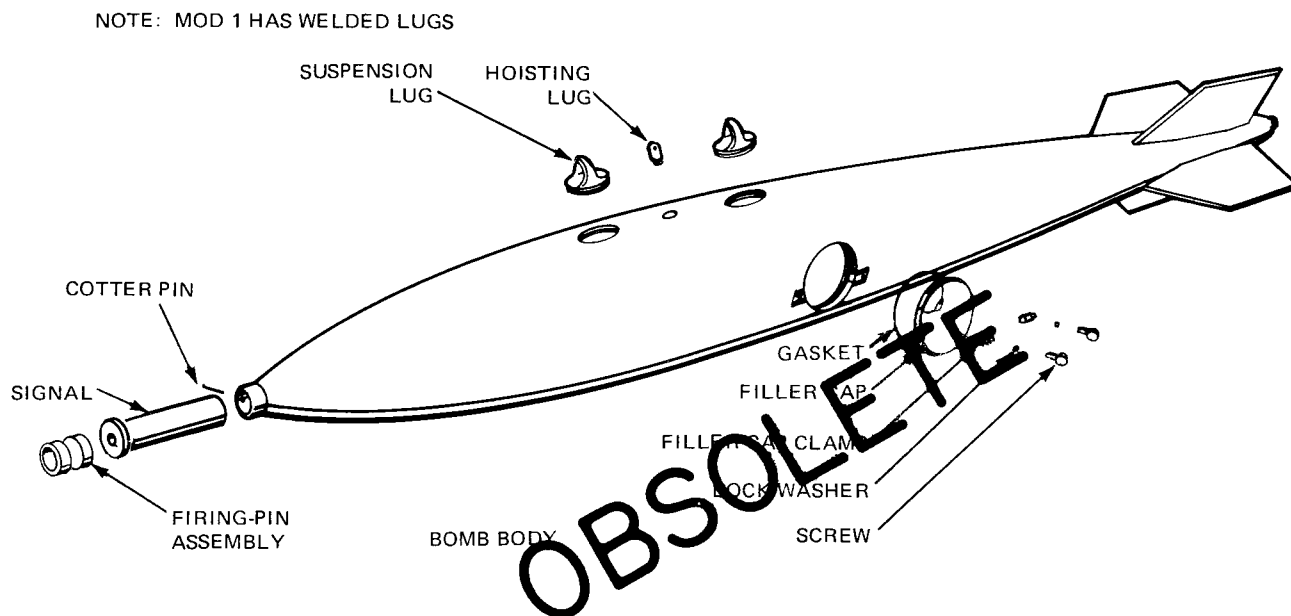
Typical Wet Sand-Filled Bomb MK 86, MK 87, or MK 88 — Exploded View
